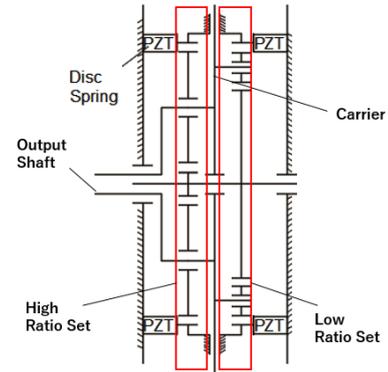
Gear sketch of the 2-speed planetary gear transmission
